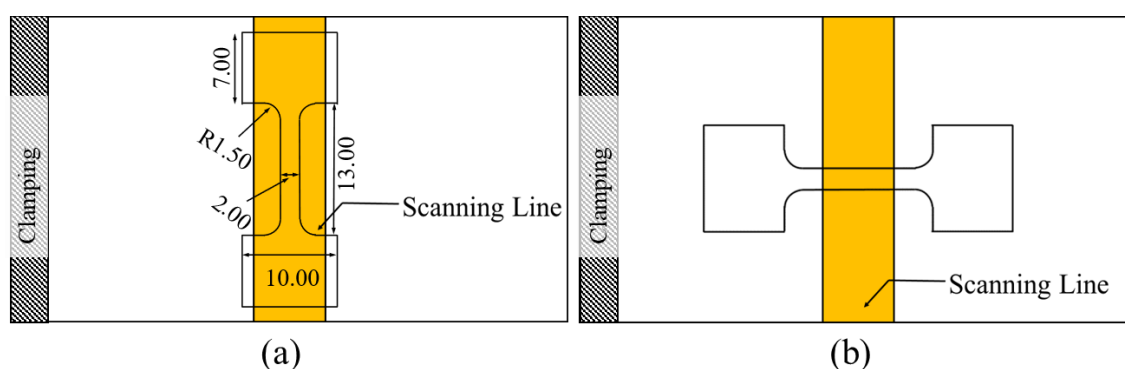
Dimensions and orientation of tensile test specimen (a) along the scan line and (b) perpendicular to the scan line
